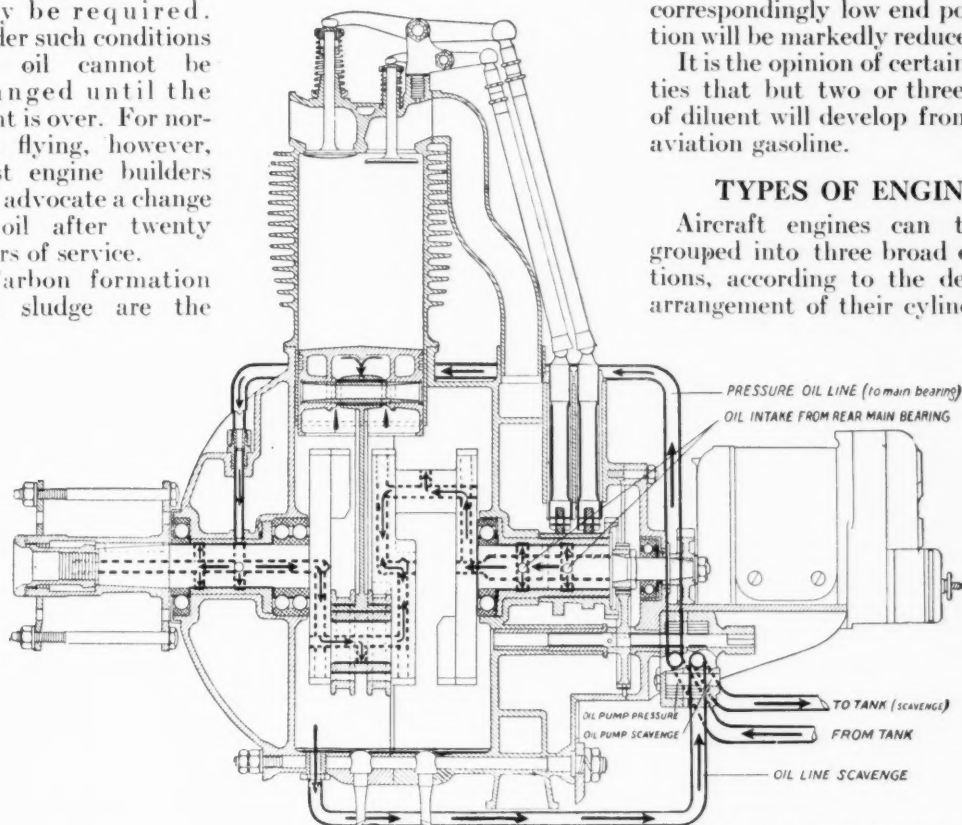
Sectional view of the Anzani radial type engine. Arrows and heavy black lines show path of oil through the lubricating system. Pressure lubrication prevails to all parts except piston pin bearings which are lubricated along with the cylinders by oil thrown from the connecting rod elements.
